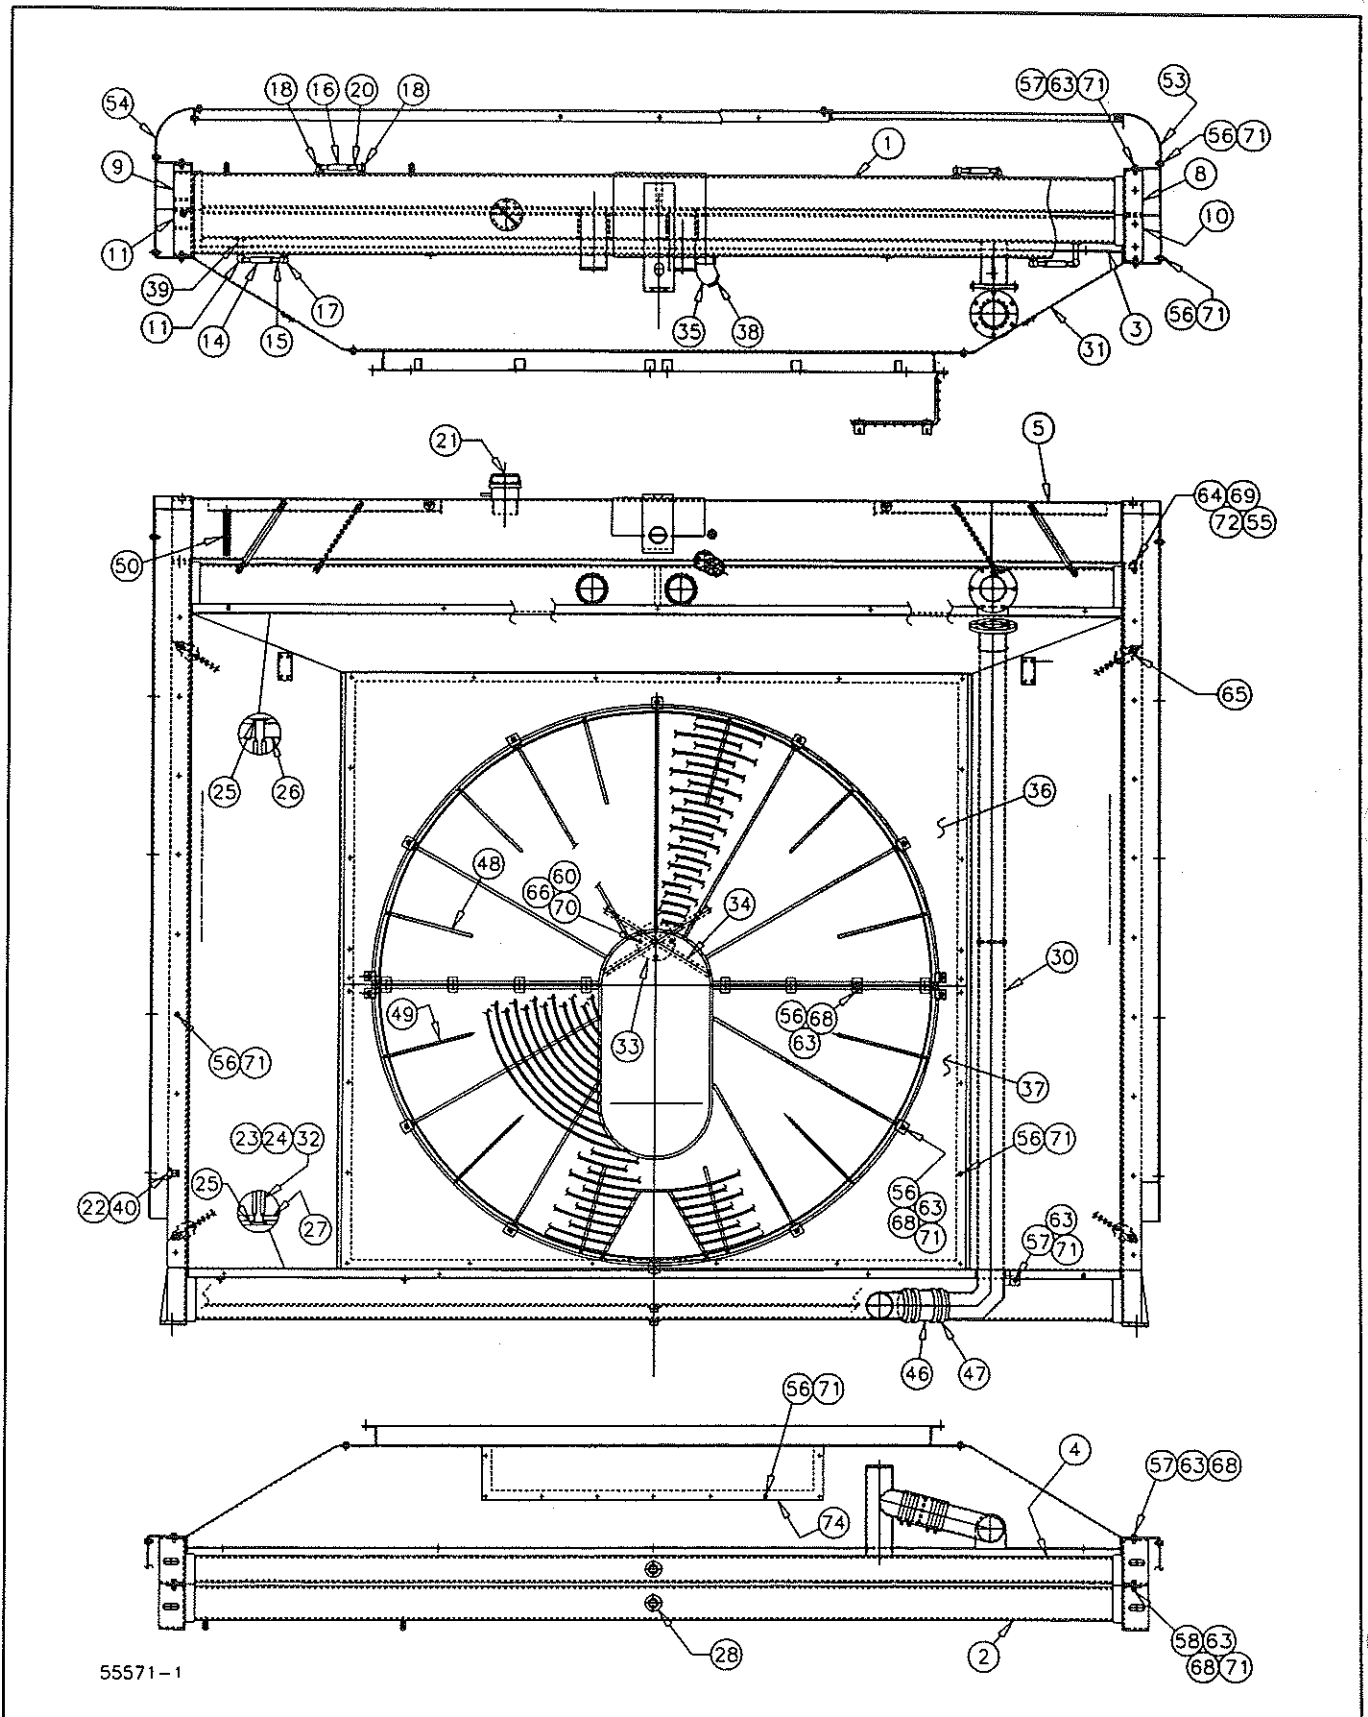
TYPICAL RADIATOR ASSEMBLY
